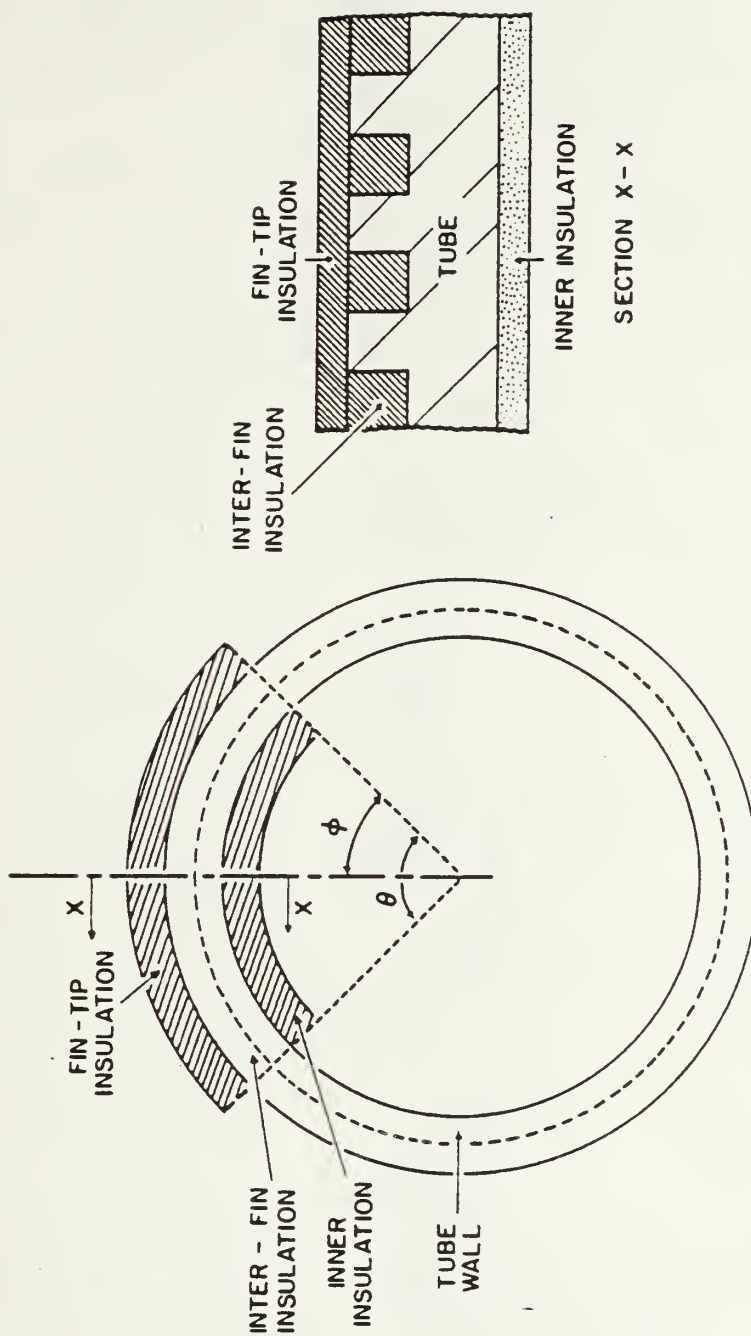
Schematic of Tube Cross-Section Showing Insulation.
